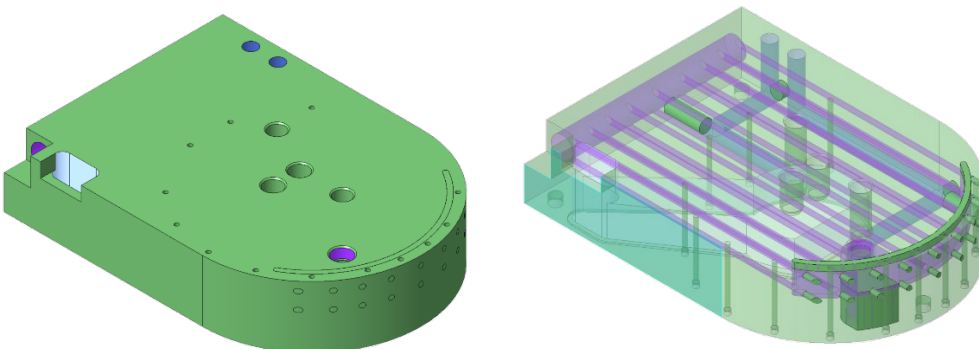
Lower backbone plate machined from stainless steel plate.
